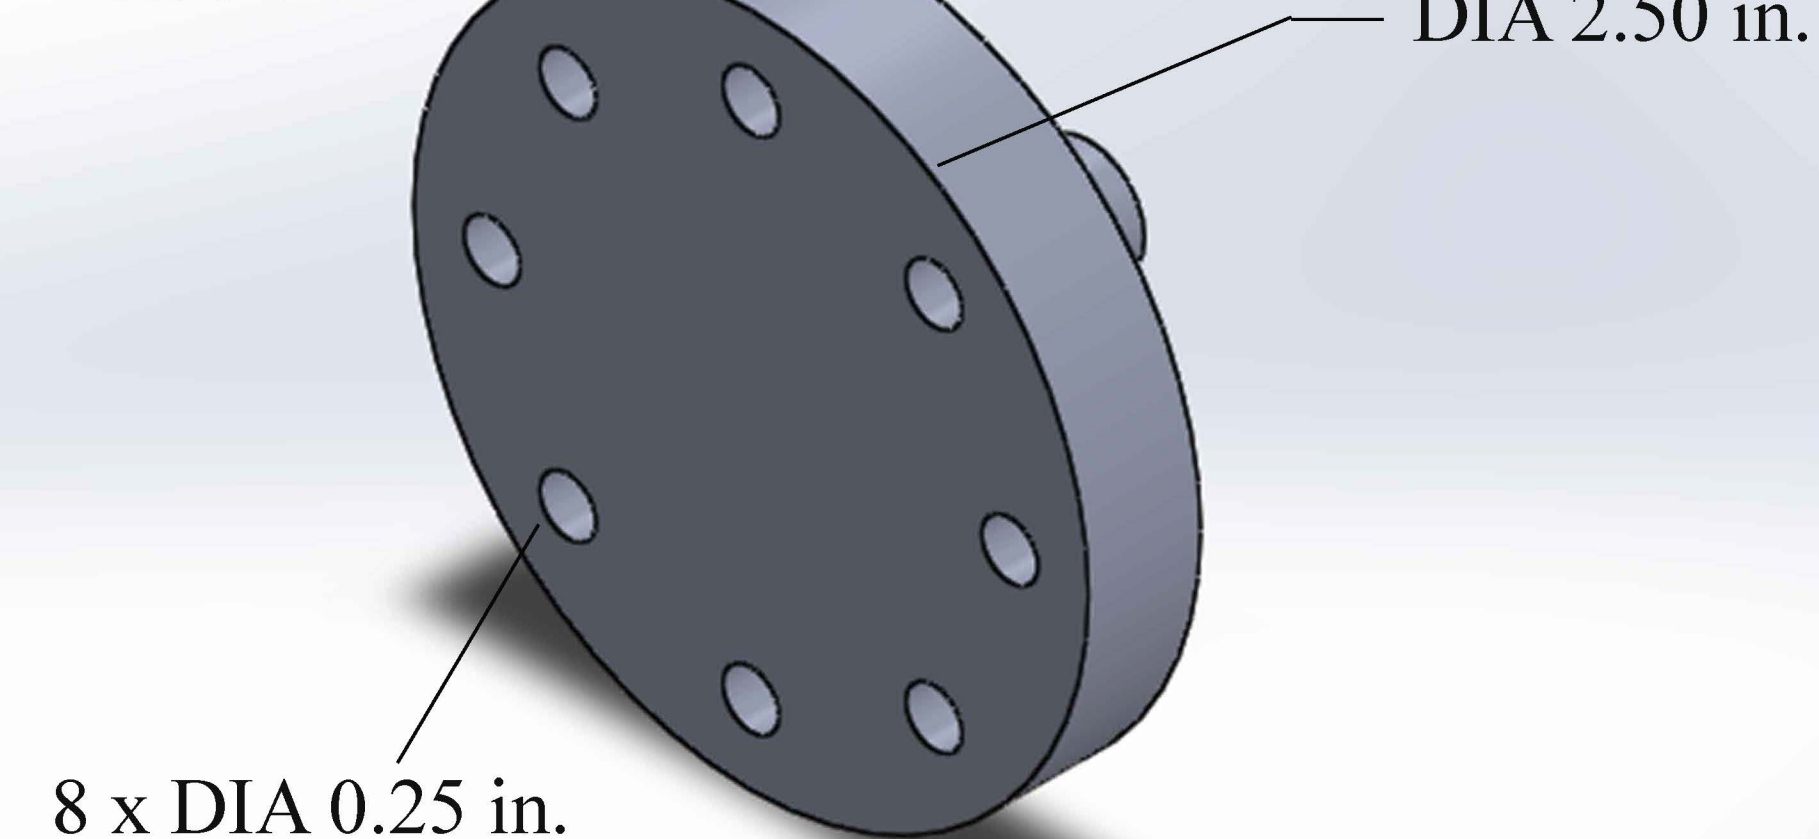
Passive vibration control mechanism. This is the initial prototype. The final product will consist of a specialized housing to contain all components.
